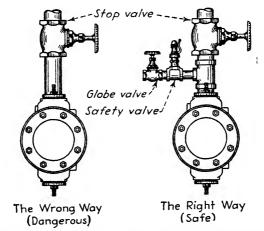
Always install a safety valve between cylinder and stop valve. (Courtesy of Compressed Air Institute.)
